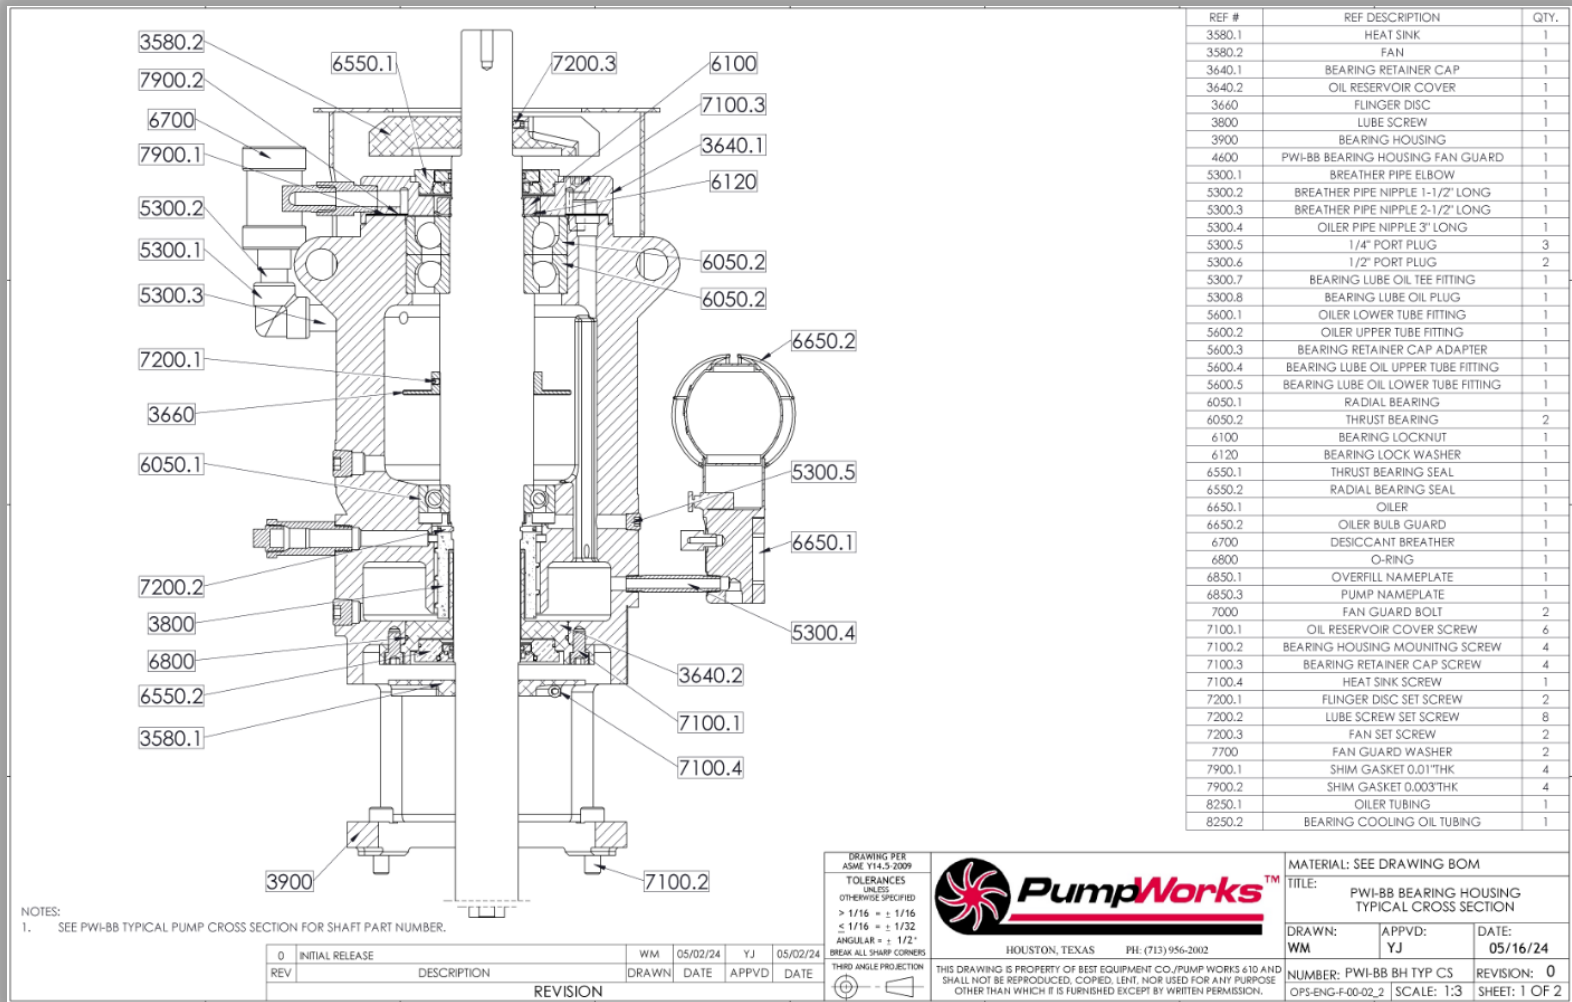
Typical PWIBB Bearing Housing Cross Section 1
